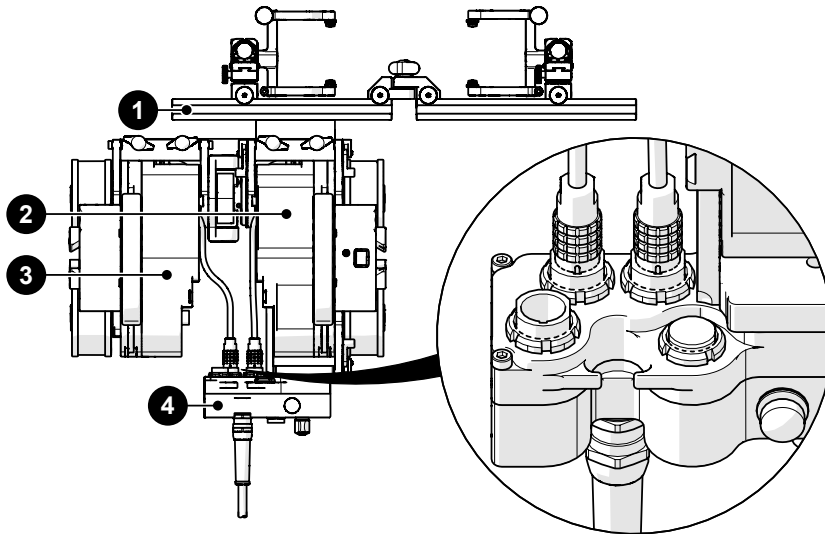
Standard crawler configuration with pivoting probe holder frame configured for flange scanning
